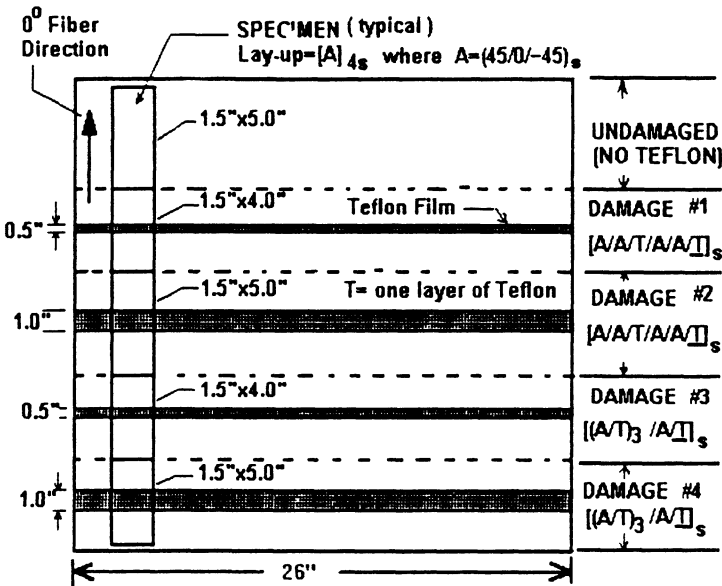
Details of a typical resin-transfer-molded plate processed for the specimens.
